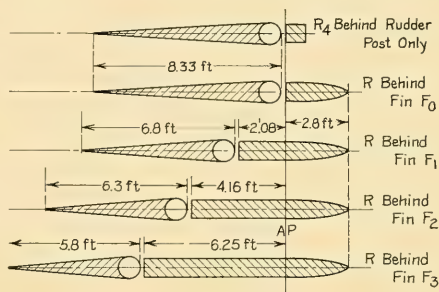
F RUDDER-FIN ASSEMBLIES OF G. H. BOTTOMLEY
